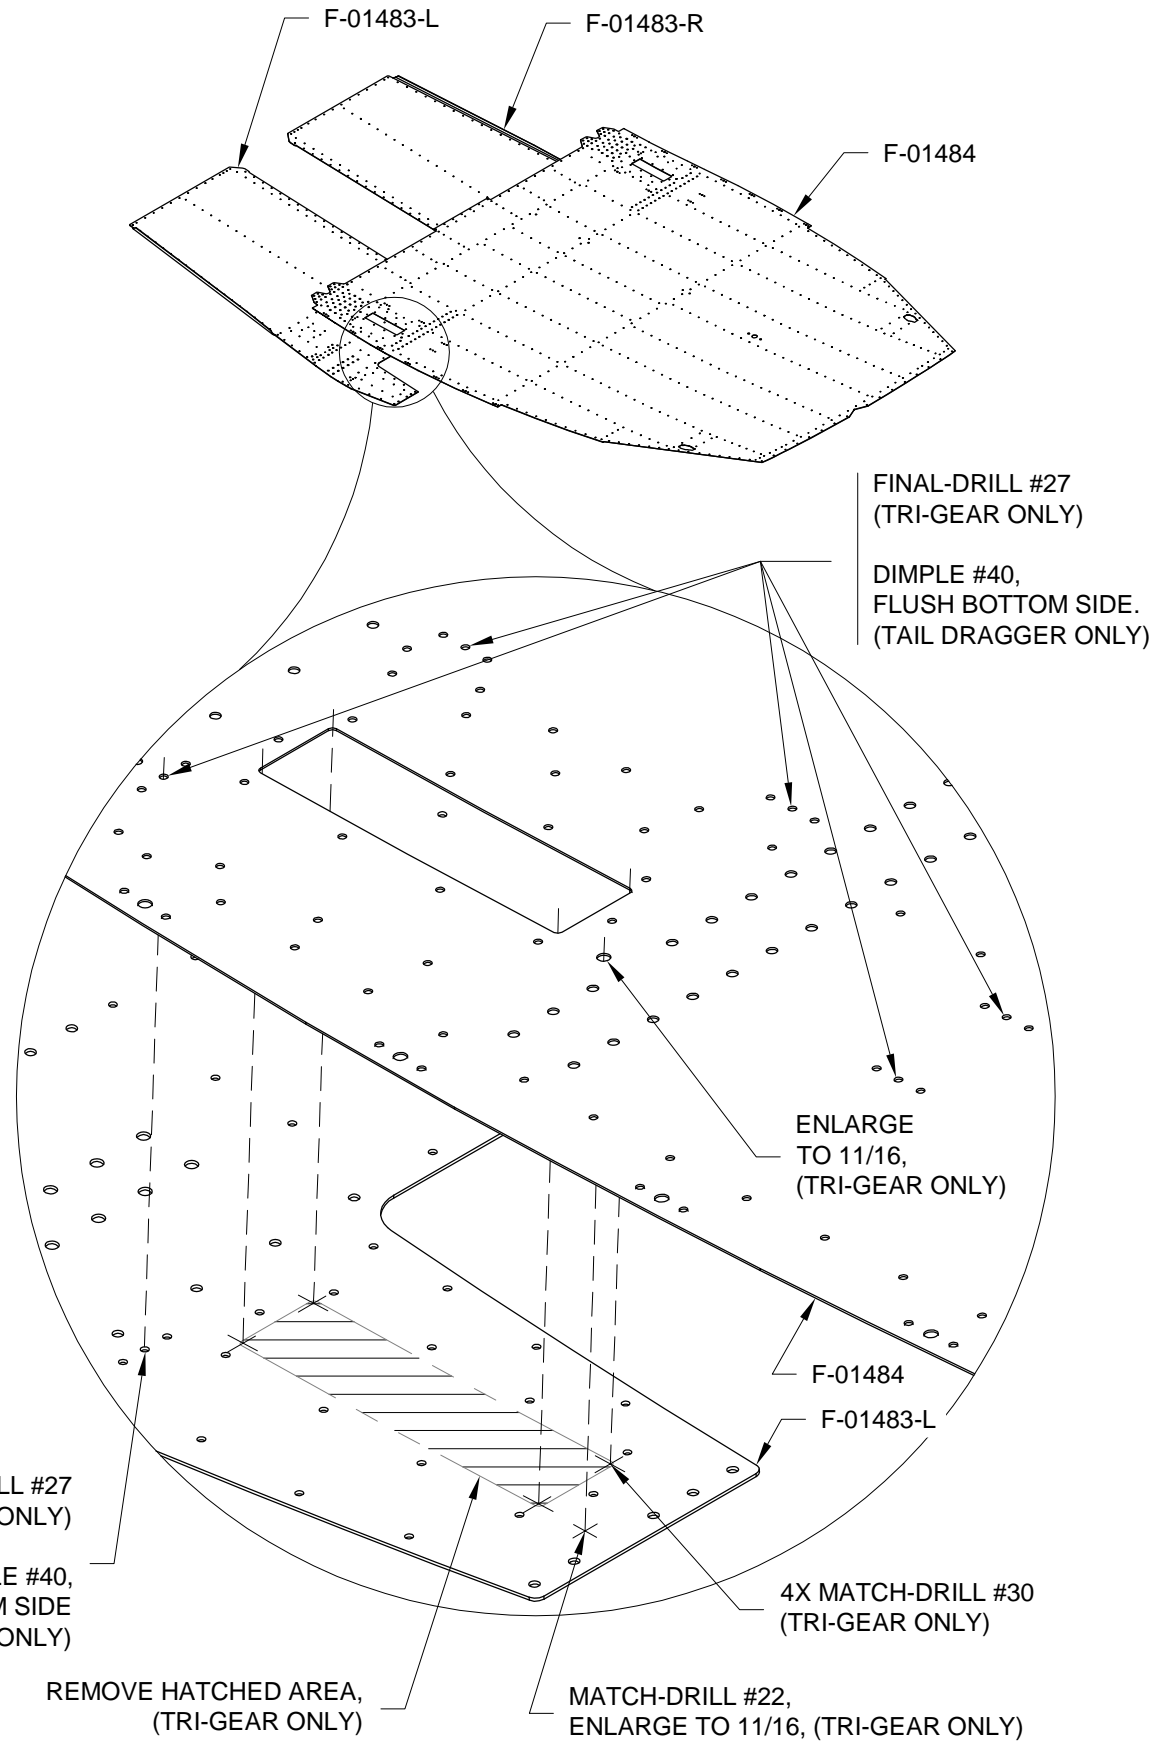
FORWARD & CENTER BOTTOM SKINS
